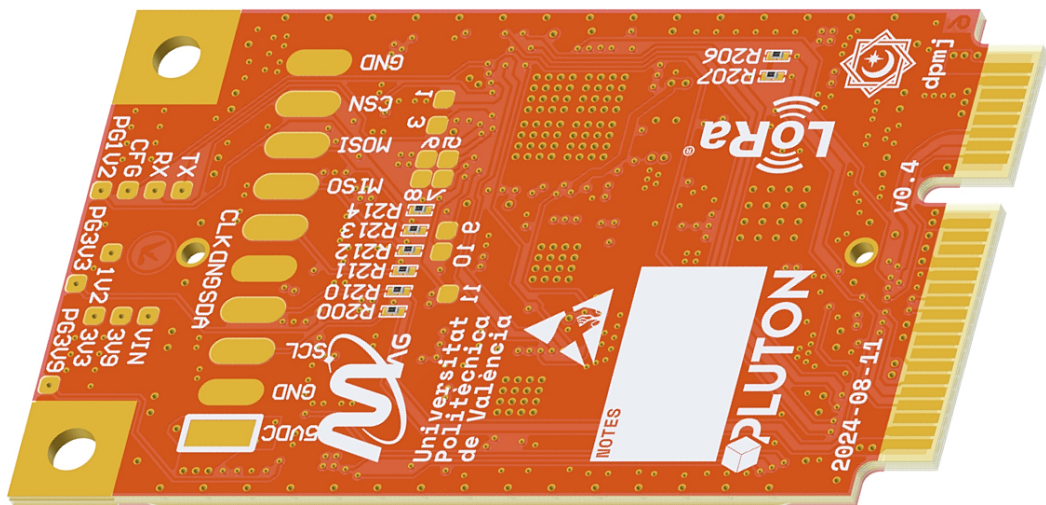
LoRa module: PCB prints. Bottom copper (L6), silkscreen, solder, and signal 2 (L4).
